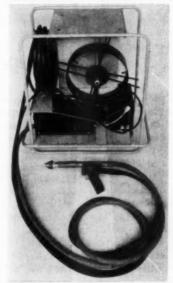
Equipment for inert-gas-shielded metal-arc welding.
